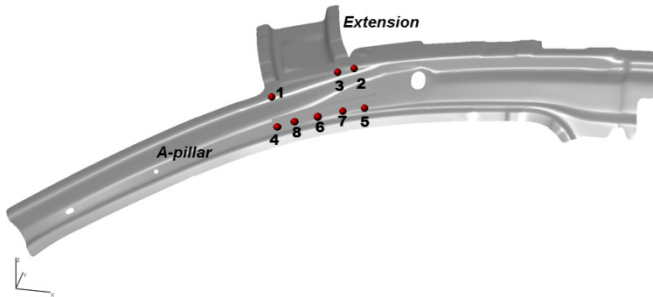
The A-pillar assembly consists of two parts, the A-pillar and its extension, which are joined with eight spot welds. The figures show the welding sequence.
